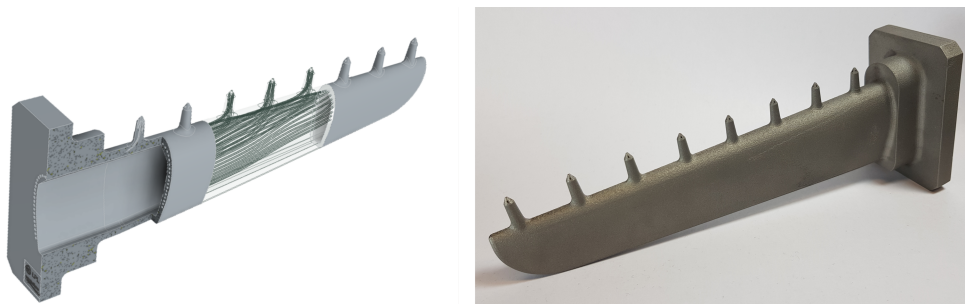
Cross-sectional view of the manually optimized measurement rake showing details of the internal pressure channels (left). Printed prototype (right).
